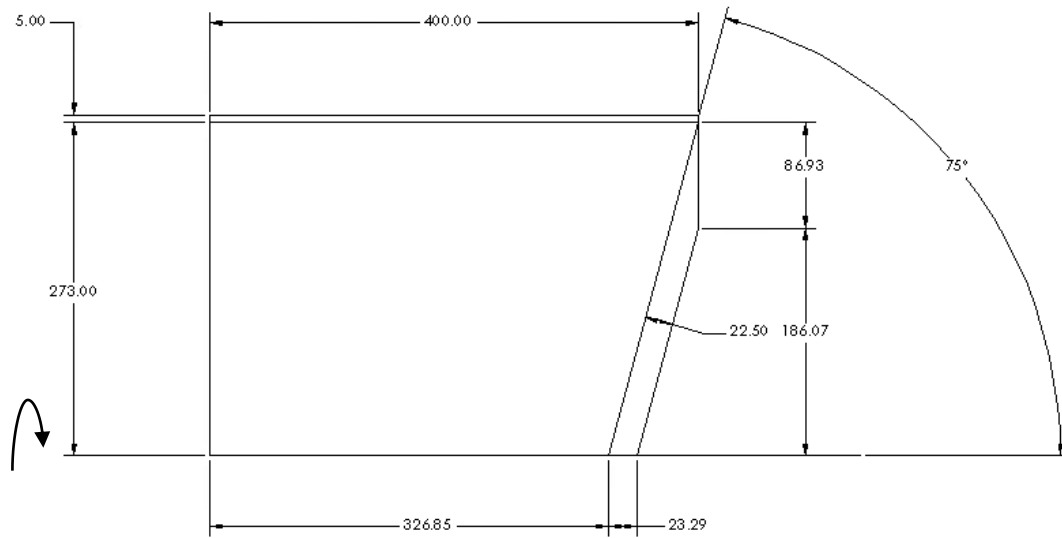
2D Drawing of 143.35 kg TNT Shaped Charge with 22.5 mm Liner Thickness (Dimensions are in mm).
